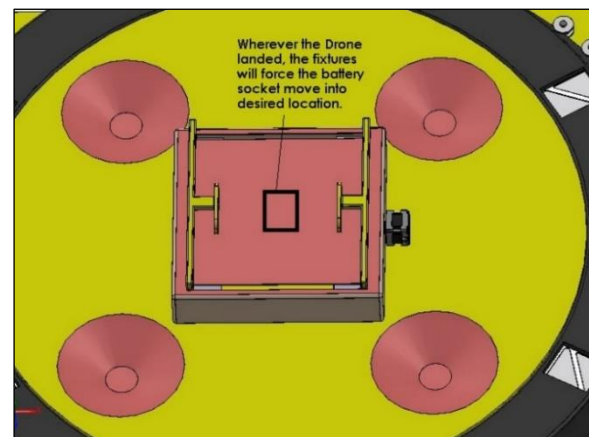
Drone’s positioning by the fixtures and cone shape platform.
